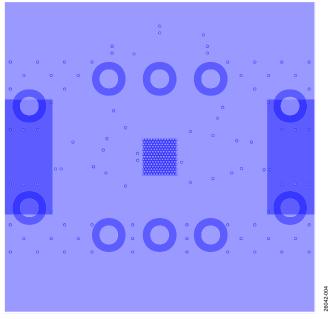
ADCA3270-EVALZ Assembly Drawing (Bottom Side, No Components)
